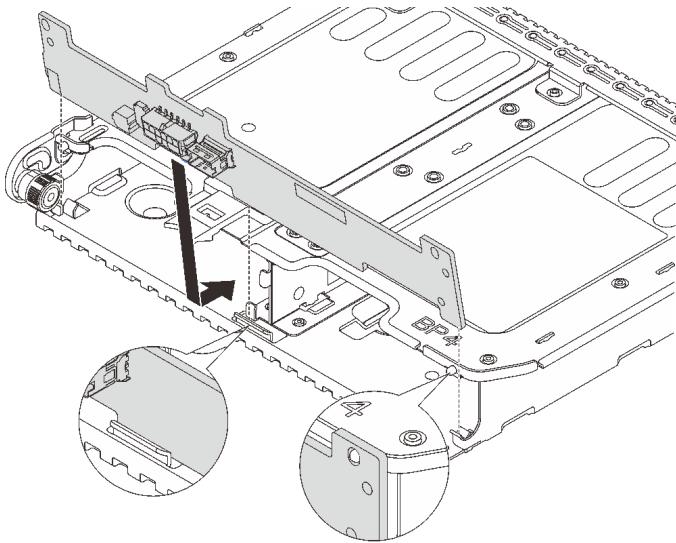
Installing the 2 x 3.5-inch rear drive backplane
